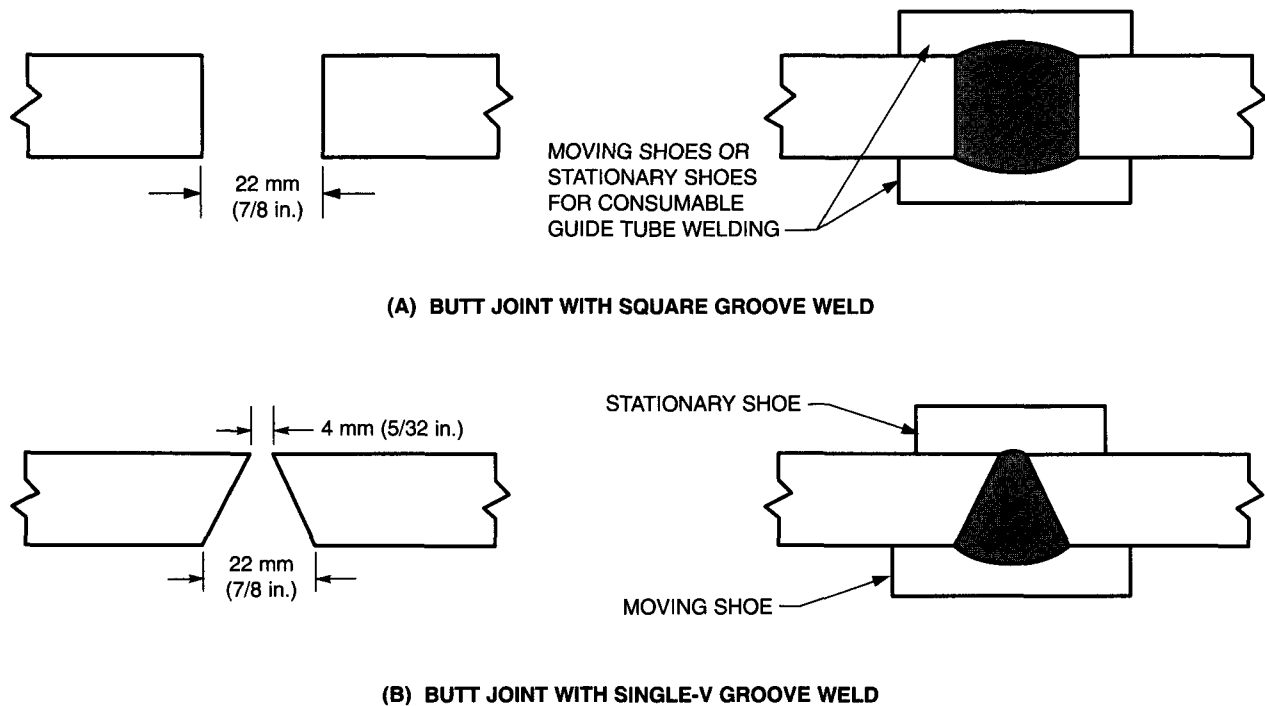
Typical Electrogas Welding Joint Designs
